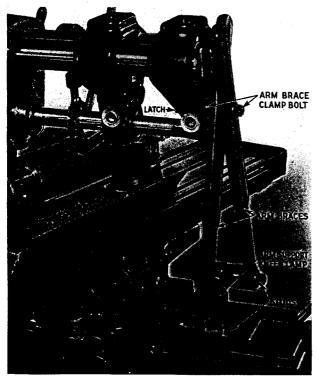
A typical set-up showing arm braces in use with outer arbor yoke. The set-up illustrated gives maximum rigidity of cutter support, because (1) cutter is near spindle nose; (2) inner arbor yoke is used, and is located close to cutter; and (3) outer arbor yoke and arm braces rigidly tie overarms to knee, keeping vibration and deflection to a minimum.
